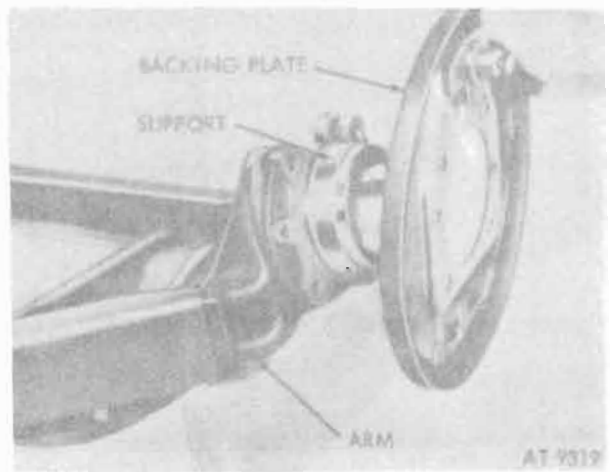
Brake backing plate and support (M151, M151A1, M151A1C and M718 vehicles).
